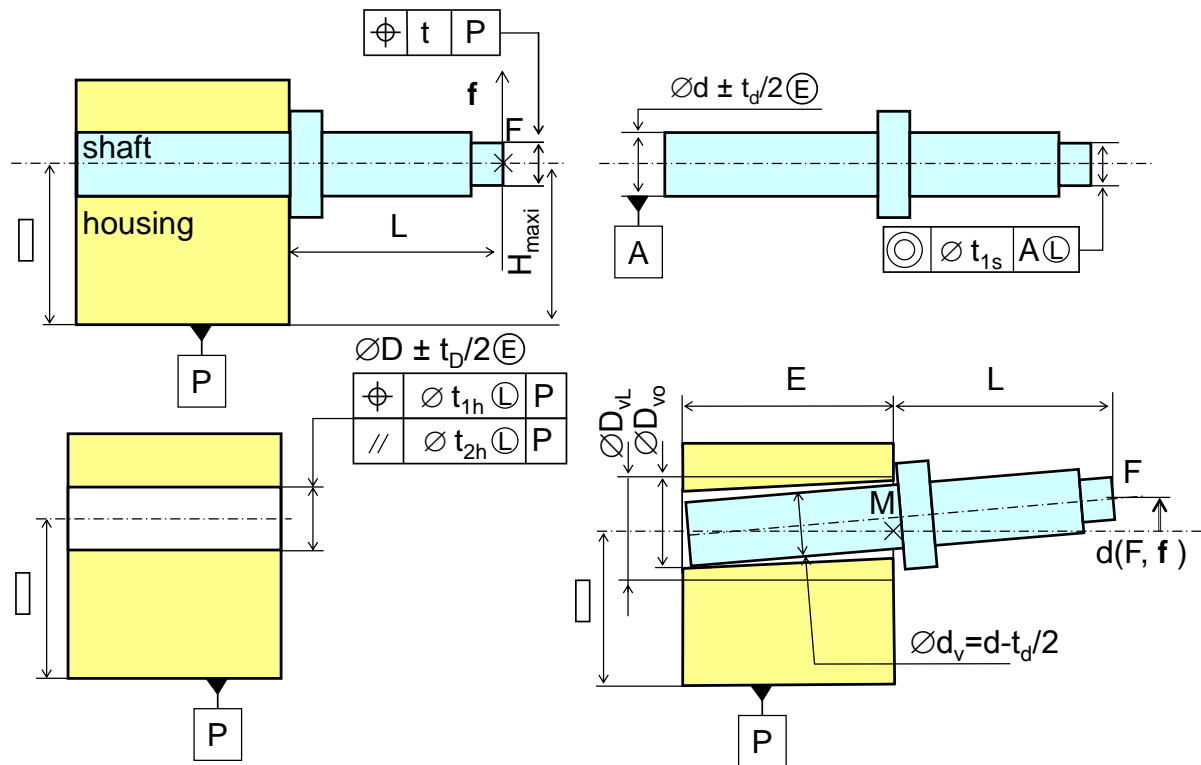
Basic tolerance chain with cylindrical link and clearance
